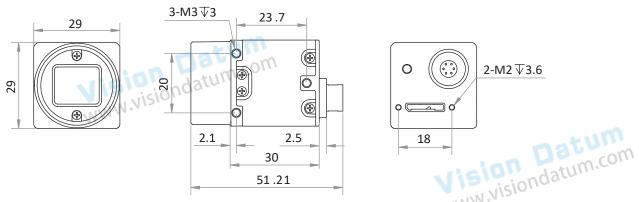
29 mm×29 mm×30 mm Mechanical Dimensions (in mm) of the -HR USB3.0 camera.
